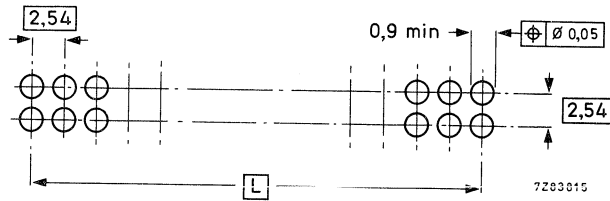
Hole pattern for male headers with 90° angled pins; see Table 1 for dimension L.
